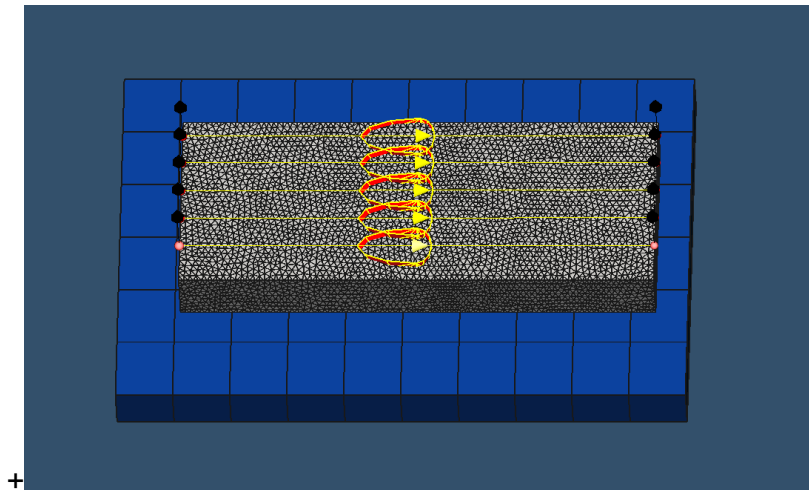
The geometric model developed for simulating the TIG deposition welding process without subsequent remelting of multi-element alloy layers
